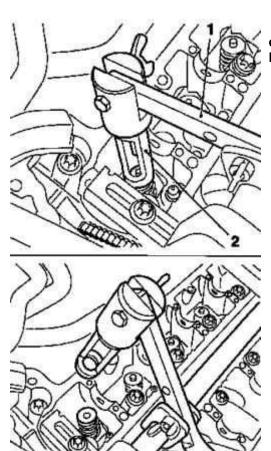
The procedure for compression of valve springs: 1 - lever, 2 - Removable Head
